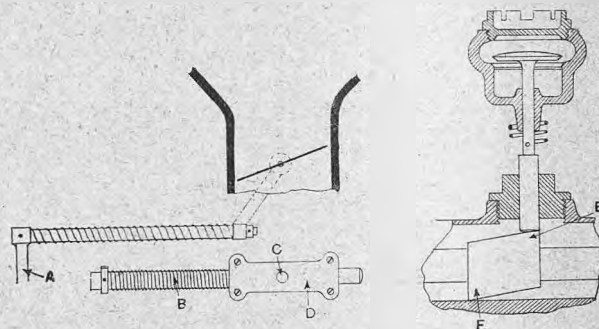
Inter-connected throttle and camshaft of the Kessler engine.
